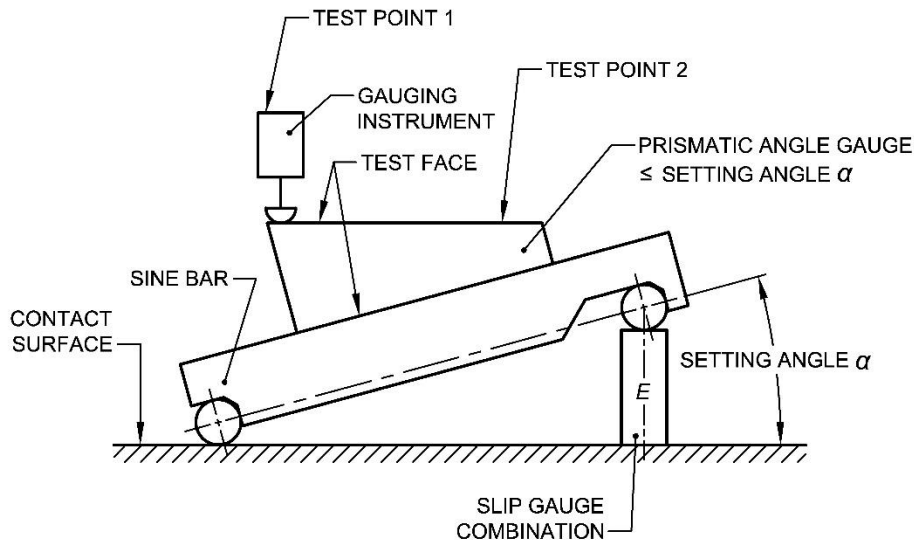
TEST ASSEMBLY (SINE BAR IN THE POSITION OF OPERATION)
